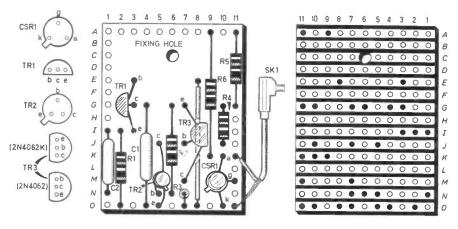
Stripboard layout and wiring of the socket. Note the leadouts of the 2N4062K transistor. There are two versions, one with the suffix K and one without. Be sure to identify which one you are using. The leadouts of the thyristor also depends on the type used, but are correct for the type specified.
